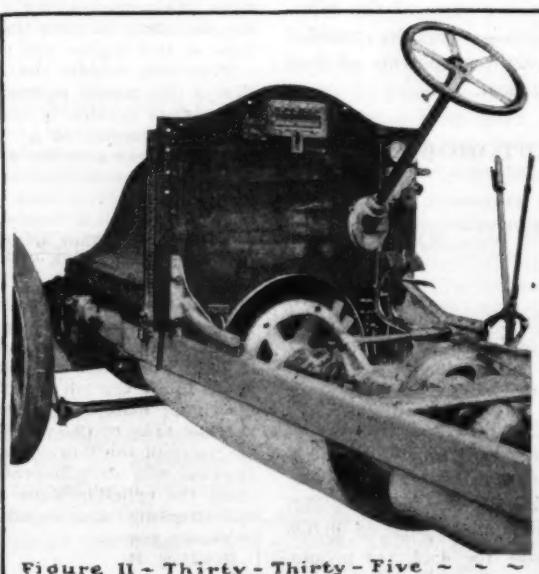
Thirty - Thirty - Five - Air Propeller on Periphery of Fly Wheel
